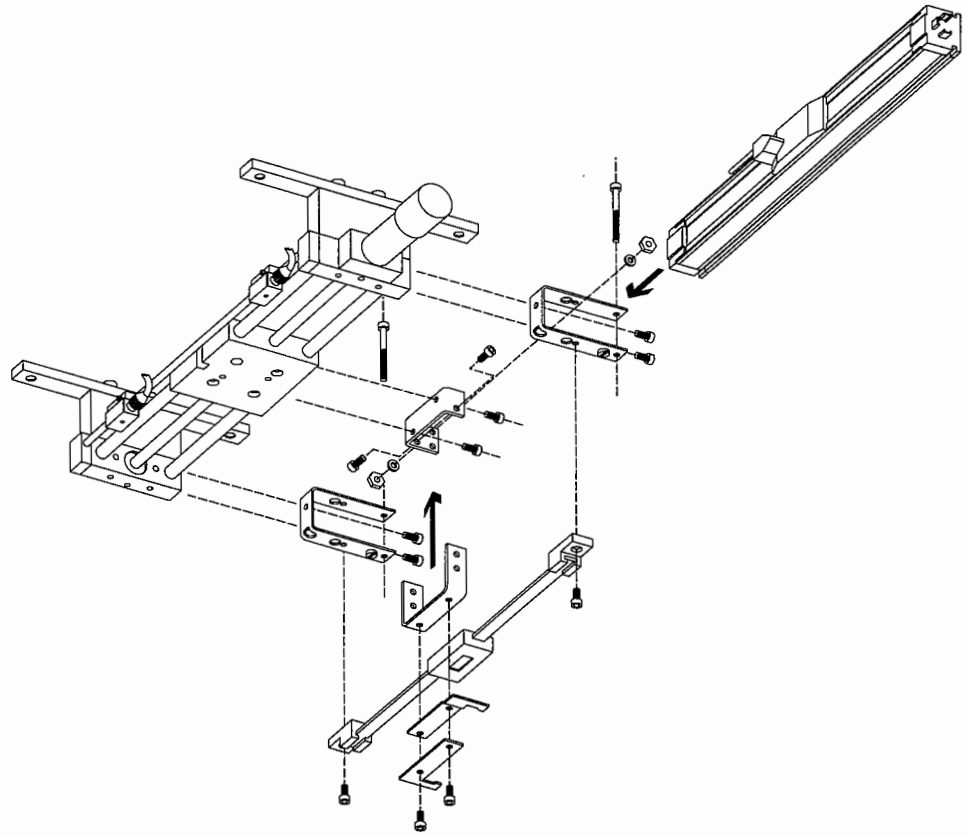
/6: Assembly of the measuring slide and linear potentiometer attachments
